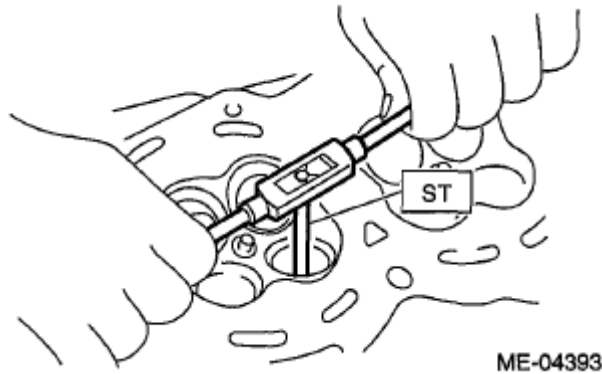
Identifying Valve Guide Reamer (ST 499767400)
